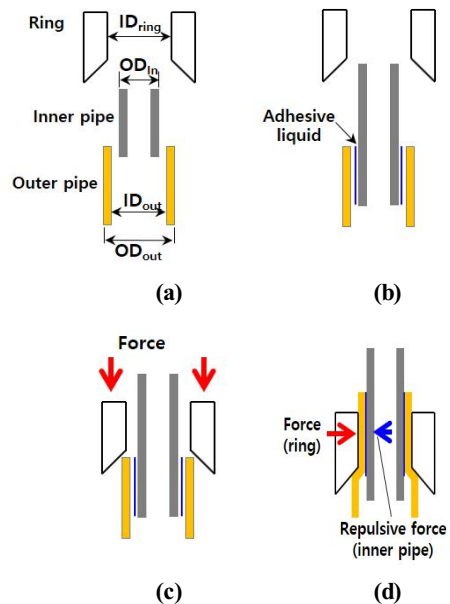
Schematic drawings of pipe connection process using clamping ring
